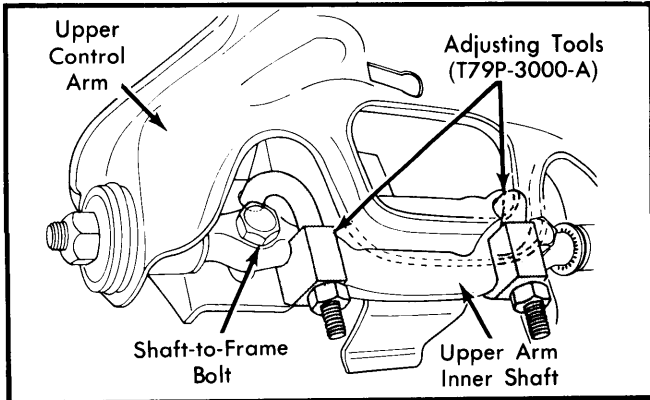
Caster and Camber Adjustment Rear Wheel Drive
